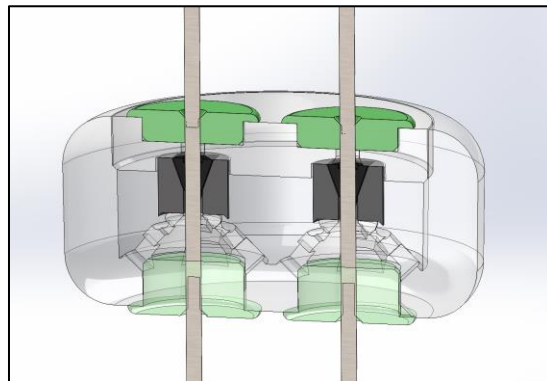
3D-printed body with plug inserted and wire penetrating through the plug. Picture from SNL.
